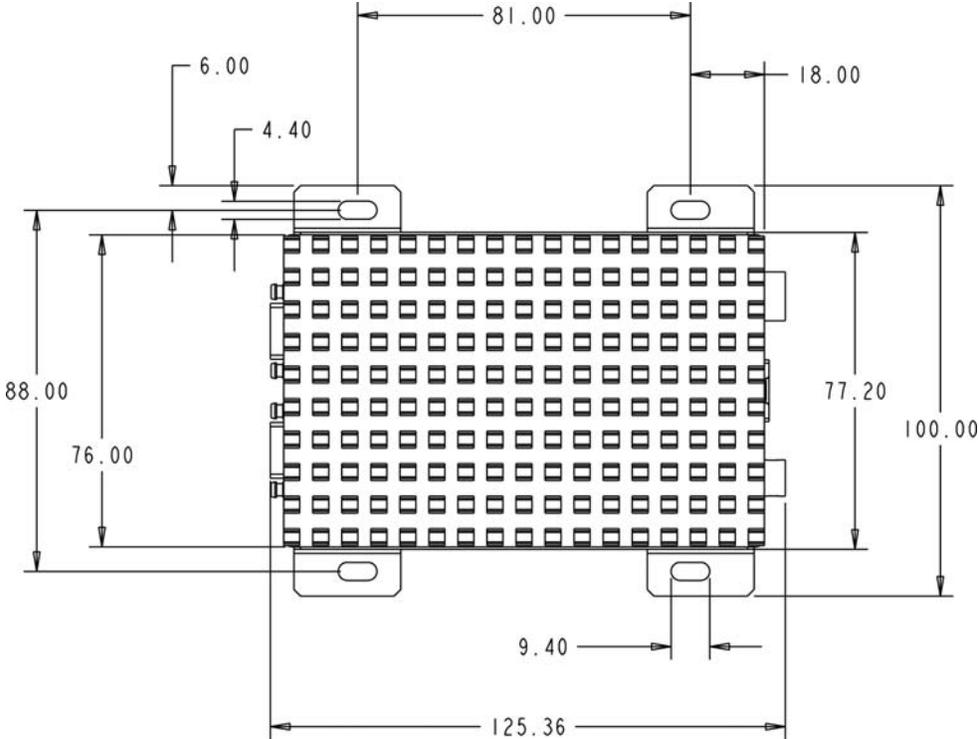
CL-Ten Full External Frame Grabber Enclosure - Side View
